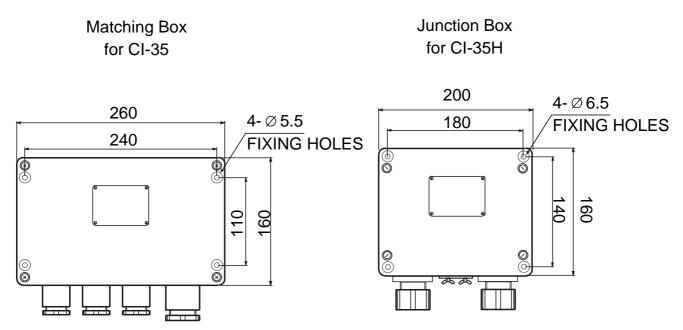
Matching Box/Junction Box Mounting Dimensions
